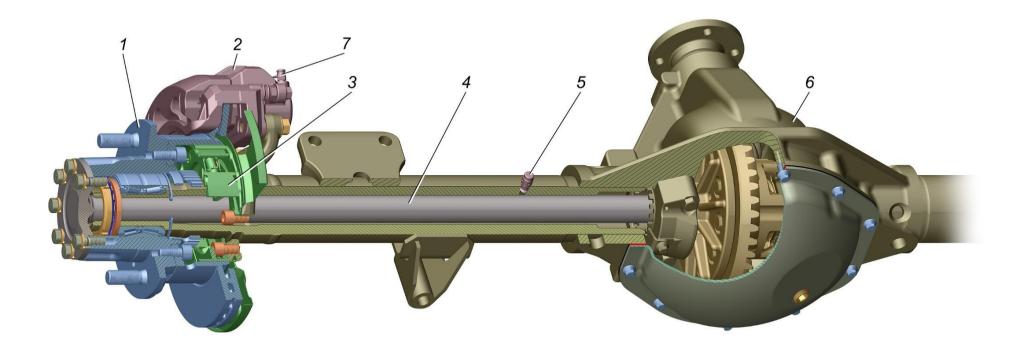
Rear axle: 1 - rear axle hub with brake disk and bearing; 2 - left disk brake; 3 - left parking brake; 4 - rear axle shaft; 5 - breather; 6 - rear axle reduction gear with axle casings; 7 - bleeding valve.
